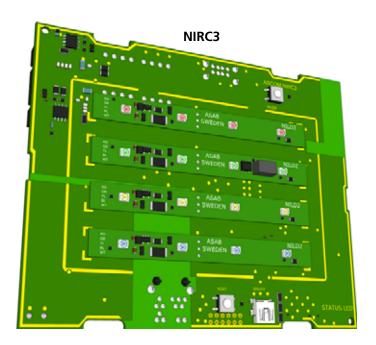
NIRC3- room controller PCB with 4 LED lamp boards
